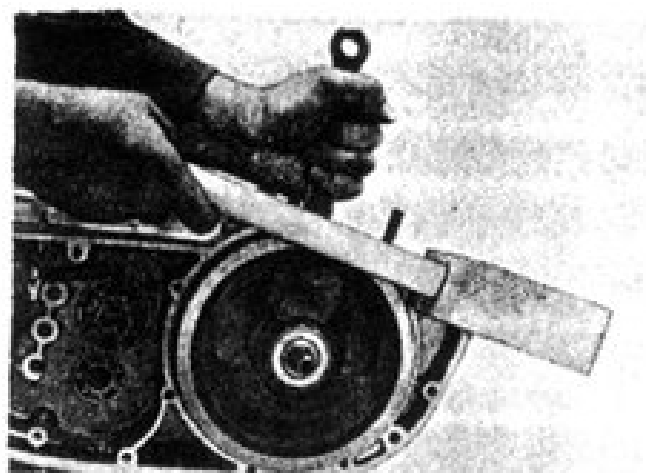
Removal of crankcase left-hand half from crankshaft half axle, HЖ-П-3 motorcycle.
